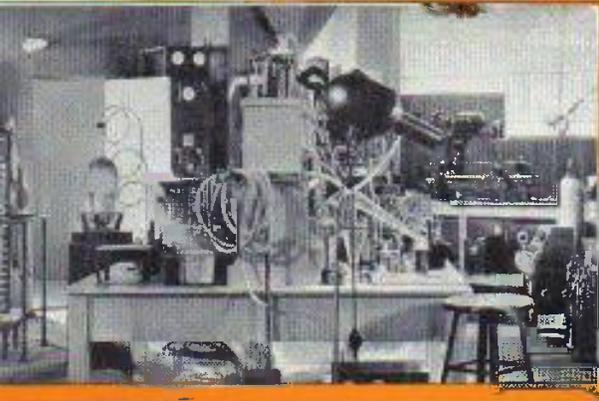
A Scientific Laboratory equipped with a South Bend Lathe.
